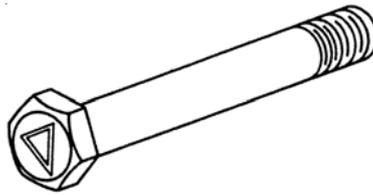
, AN173 - AB186 Close Tolerance Bolt
